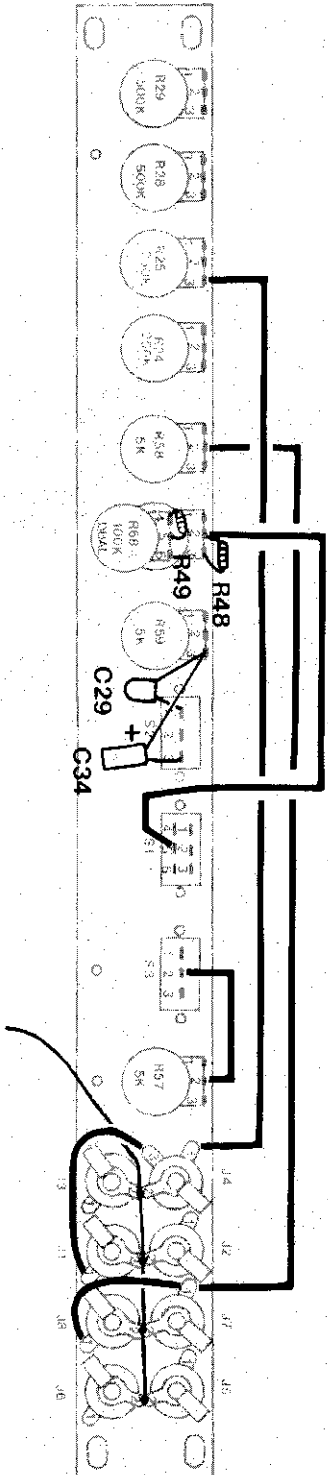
Initial control wiring. Note placement of R48, R49, C29 and C34.
